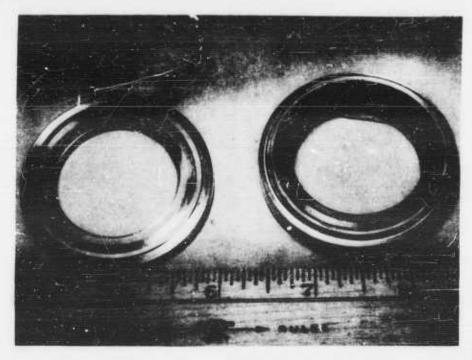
Sleeve Bearing - Glass Impregnated Teflon
